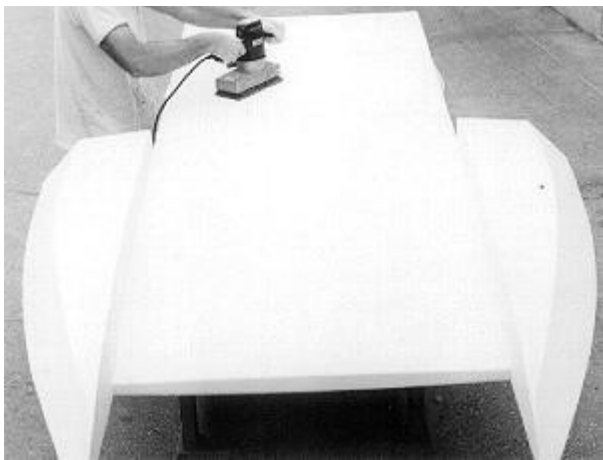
The bottom must be sanded between coats of primer to eliminate ripples and provide a smooth surface for the finish coat.
